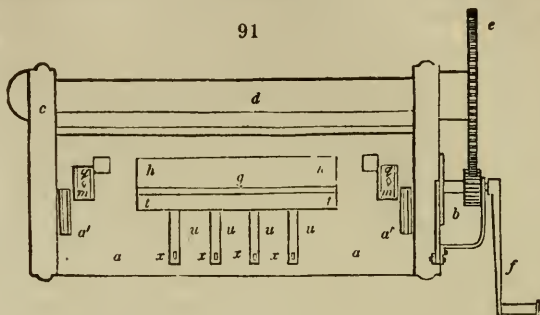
, 89, 90, 91, represent a well contrived machine for that purpose; of which fig. 88, shows the front view, fig. 89, a view from the left side, fig. 91, a ground plan
